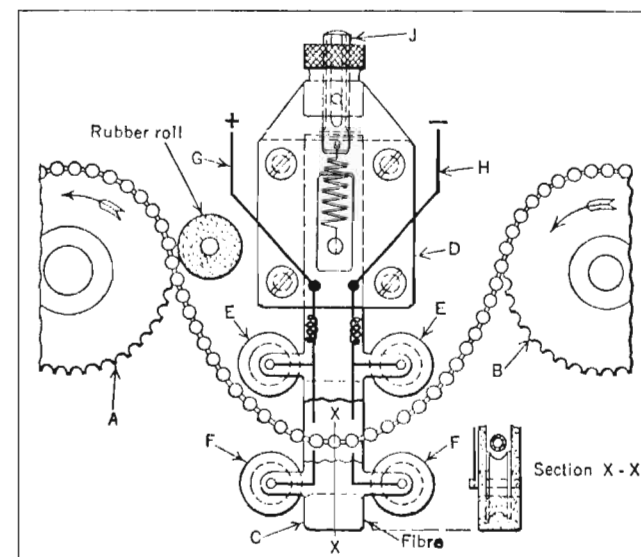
Electrical Tripping Device that Stops Machine when Chain Breaks or when the Slack Varies
